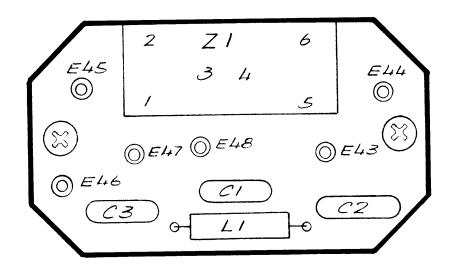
RF Input Mixer Assembly Z307, Location of Components
